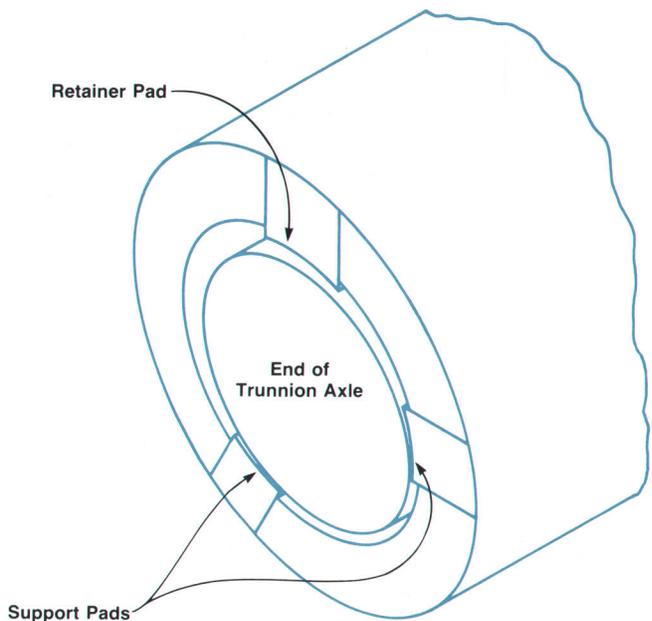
Trunnion axle bearing. Two integral raised pads are machined 120° apart on the inner surface of a ring to support the axle. A third pad located above the axle serves as a retainer.
